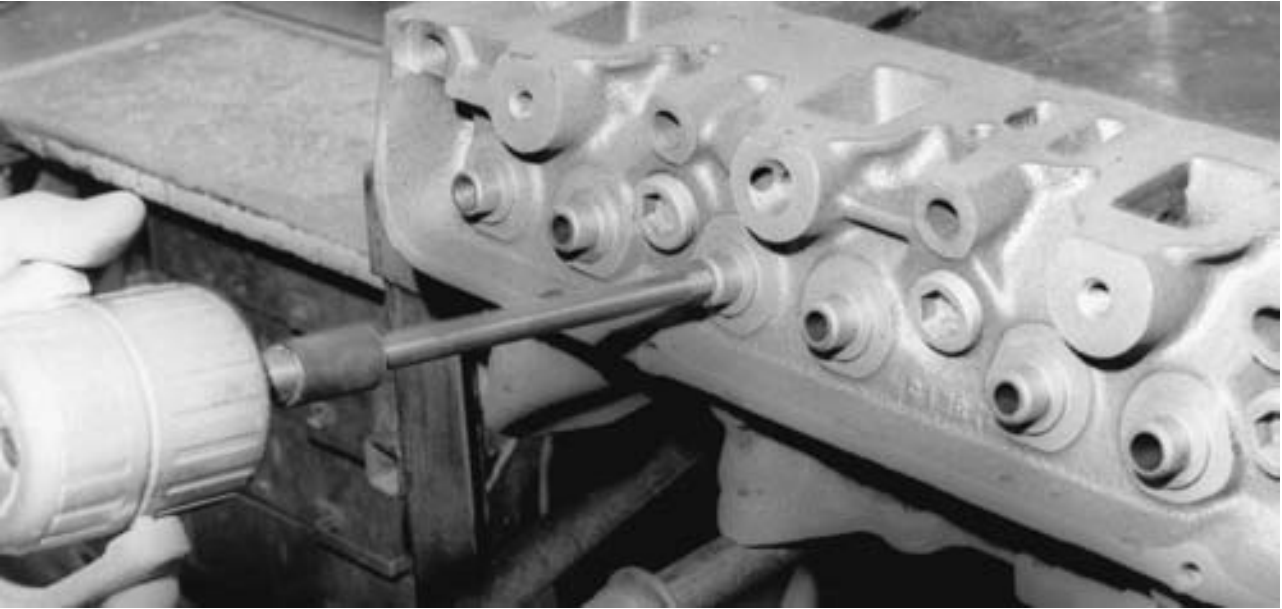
Knurling tool being used in a valve guide. After the knurling tool displaces the metal inside the guide, a reamer is run through the guide to produce a restored, serviceable valve guide.
